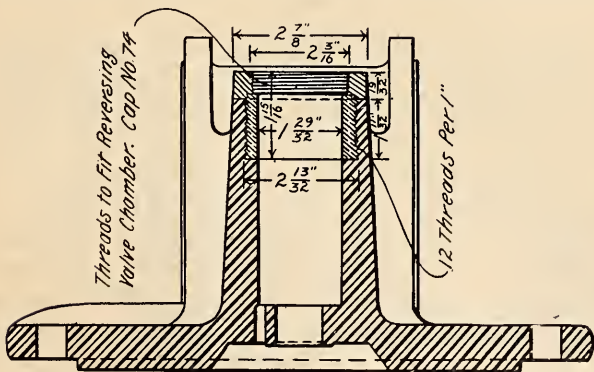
METHOD OF BUSHING REVERSING VALVE CHAMBER OF 9 1/2-IN. AIR PUMP.
